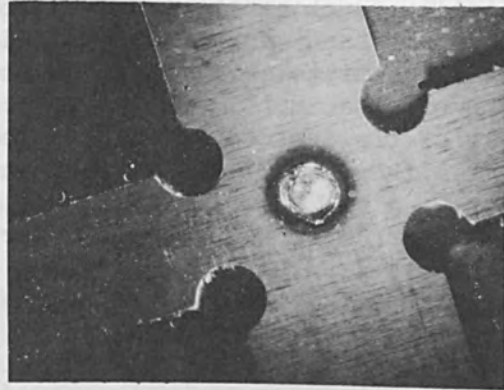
Close-up of molybdenum deposition mask weld.
